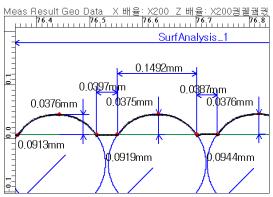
Profile of formed lenticular by press forming with machined pattern
